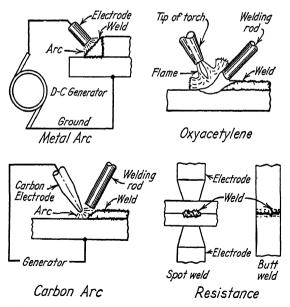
Welding processes. From H. Malcolm Priest, Practical Design of Welded Steel Structures, American Welding Society.
